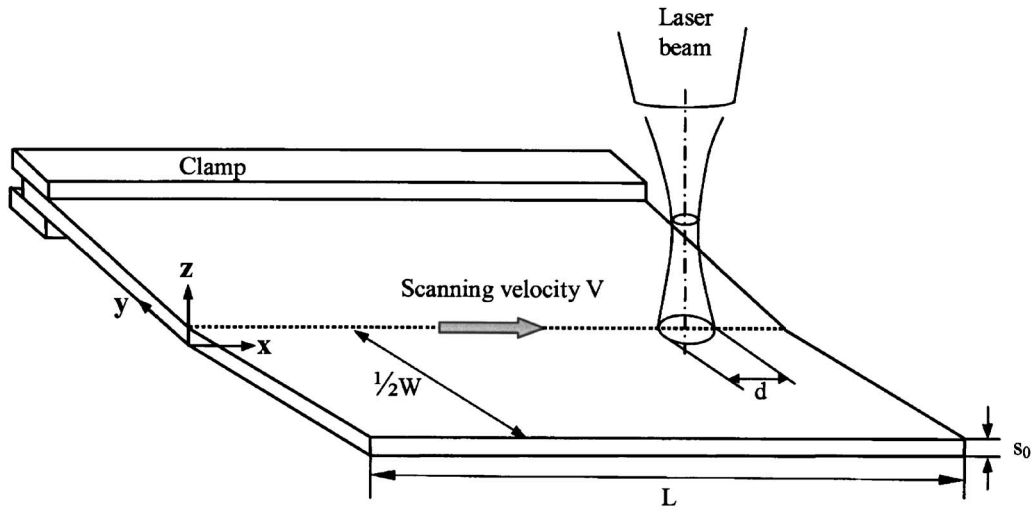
Schematic of straight-line laser bending of Ti-6Al-4V sheet: s_0 is sheet thickness, W sheet width, L sheet length, and d laser spot diameter.
